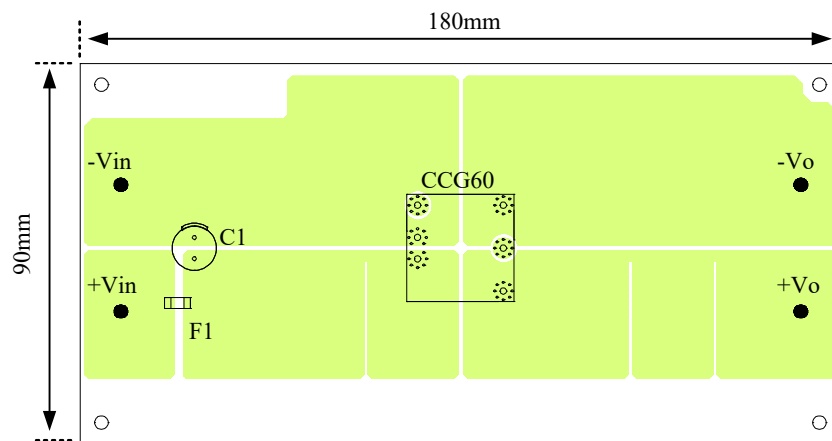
Evaluation PCB Top side (Power Supply Mounting side)
